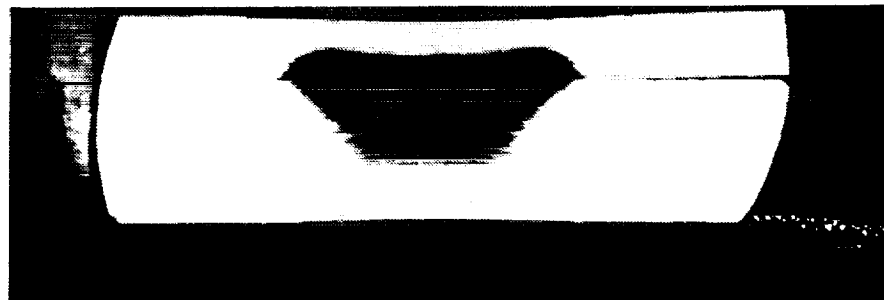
Spot Weld with Cracks and Voids in 0.090" 2090-T62 joined to 0.190" 2090-T83 Al-Li.
